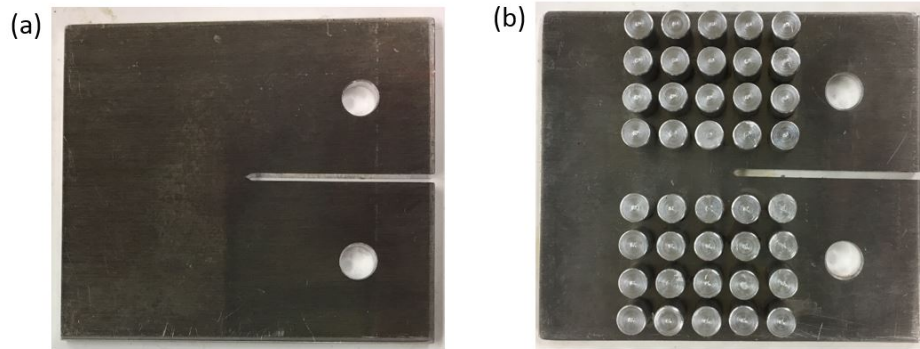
(a) The plain CT specimen, (b) the stubbed CT specimen
